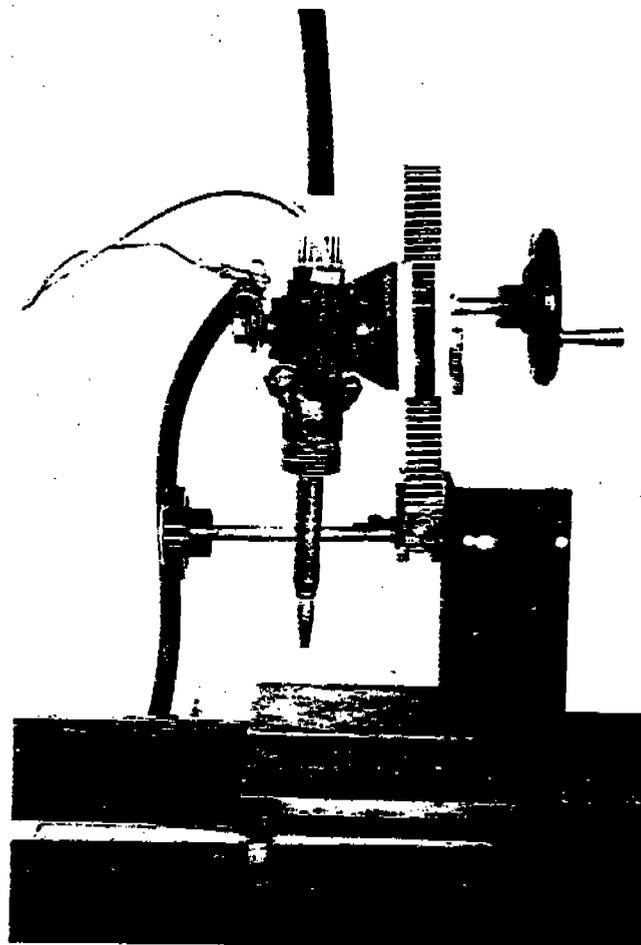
CLOSE-UP OF TORCH SHOWING THE MECHANISM FOR GUN ADJUSTMENT.
